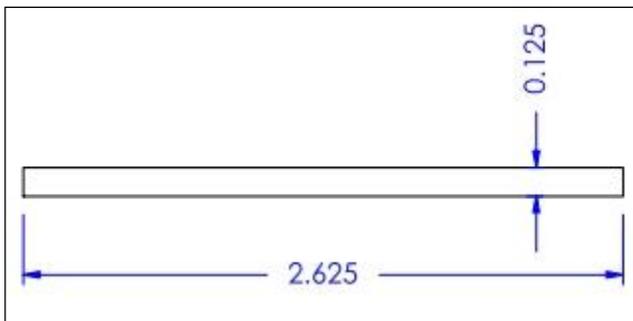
Construction drawing for the maintaining pawl arbor. This is simply a straight length of 1/8" diameter music wire.
